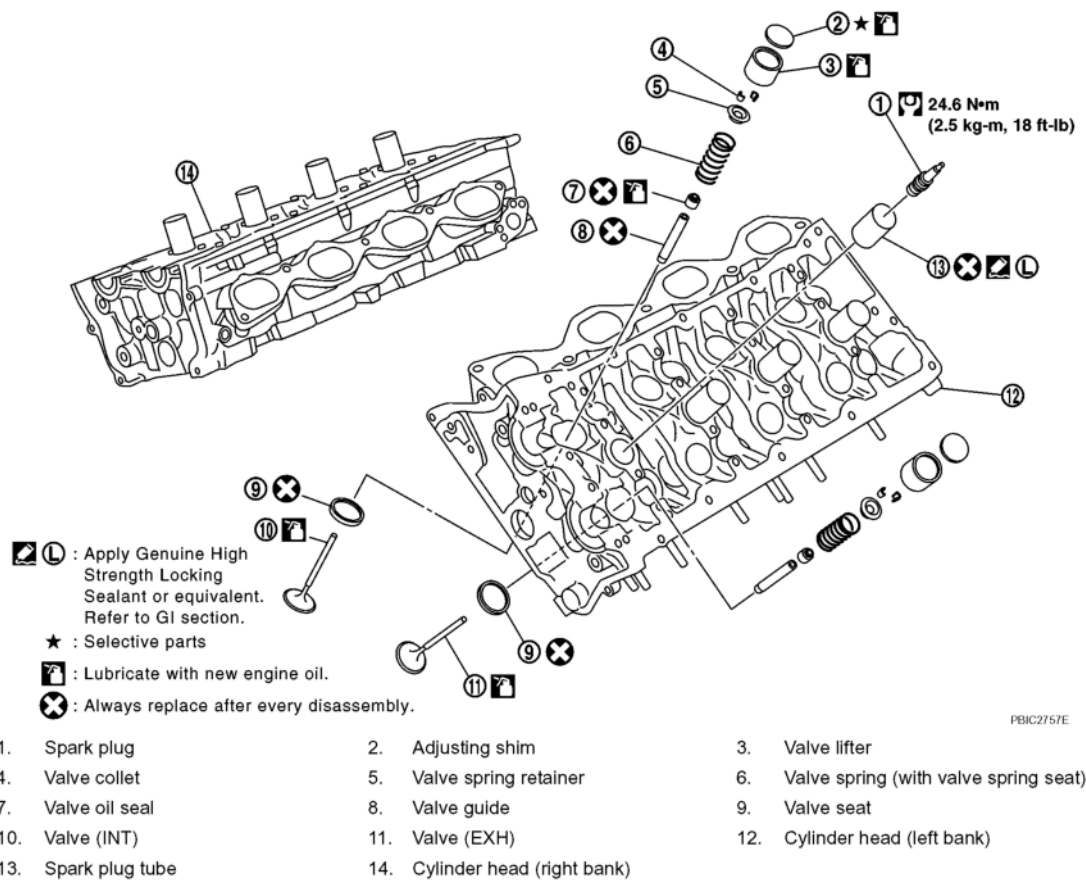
Installing Cylinder Head And Components With Torque Specifications
